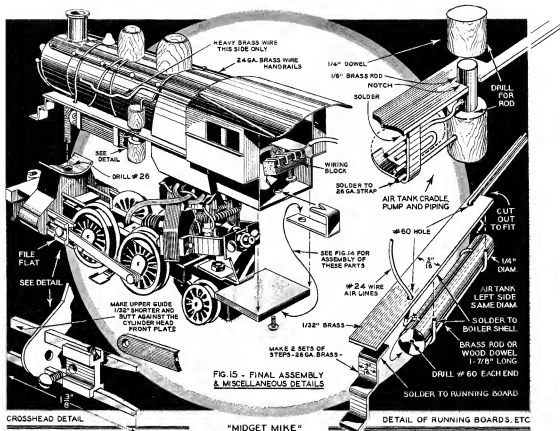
FINAL ASSEMBLY & MISCELLANEOUS DETAILS
